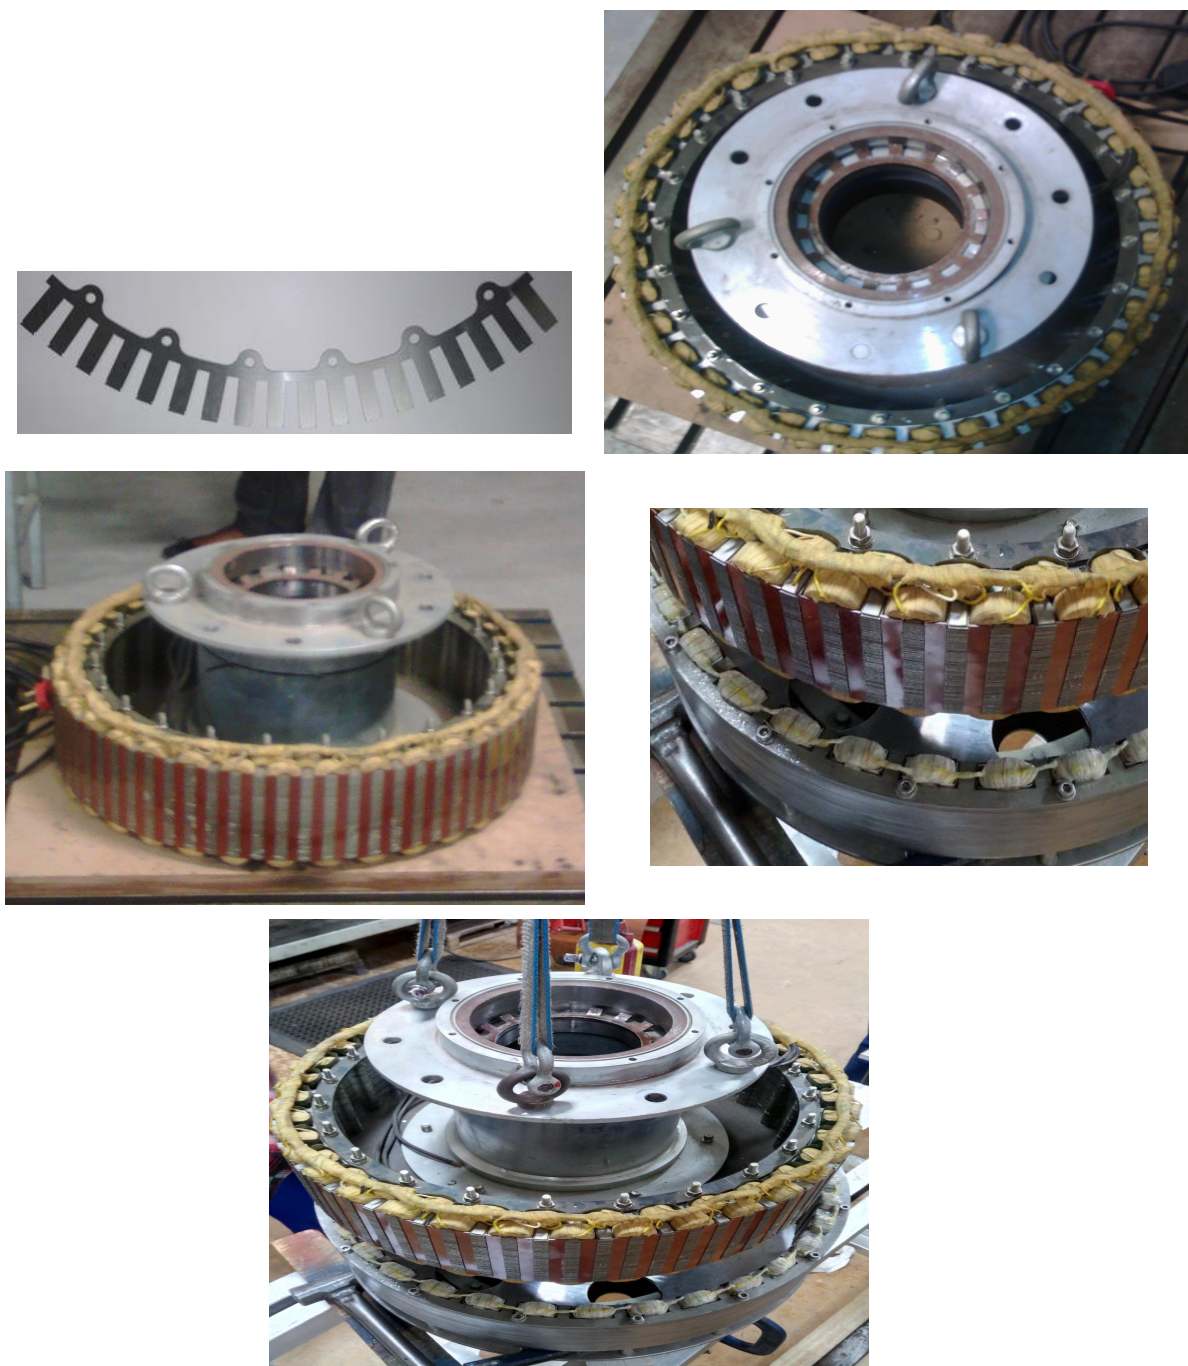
Buried-PM rotor construction: showing the full lamination, quarter lamination, Inner view of the rotor stack with with single layer coils and wedges, side-view of the fully assembled rotor stack, series connection of coils yet to be done, top-view with the holed back plate, and lastly connected rotor coils.
